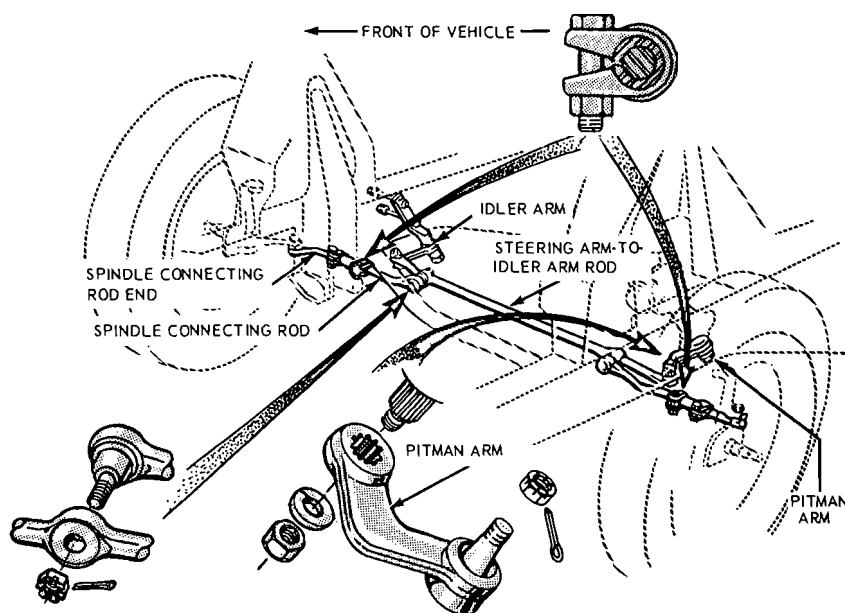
Typical Manual Steering Linkage—Power Typical—Mustang
